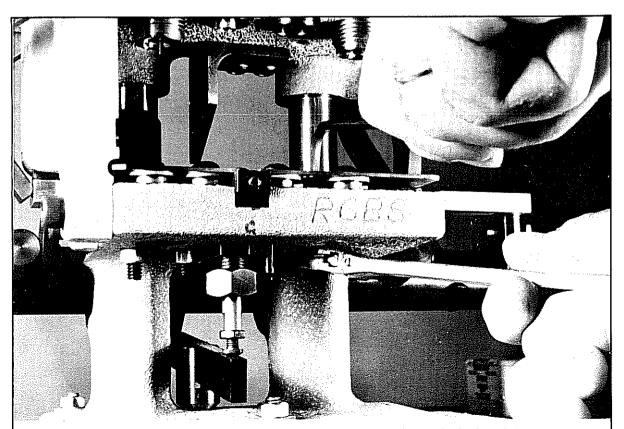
The cap screws holding the rear Transfer Rails are locked with hex nuts. A small 7/16 inch wrench and Hex Key Wrench are required for removal and replacement.
